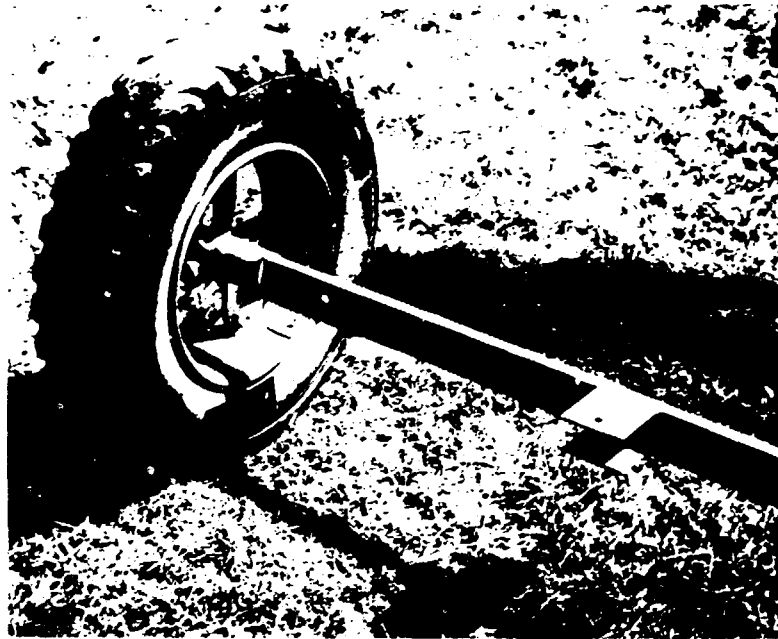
Detail of locally-developed axle/wheel assembly: Tanzania.
